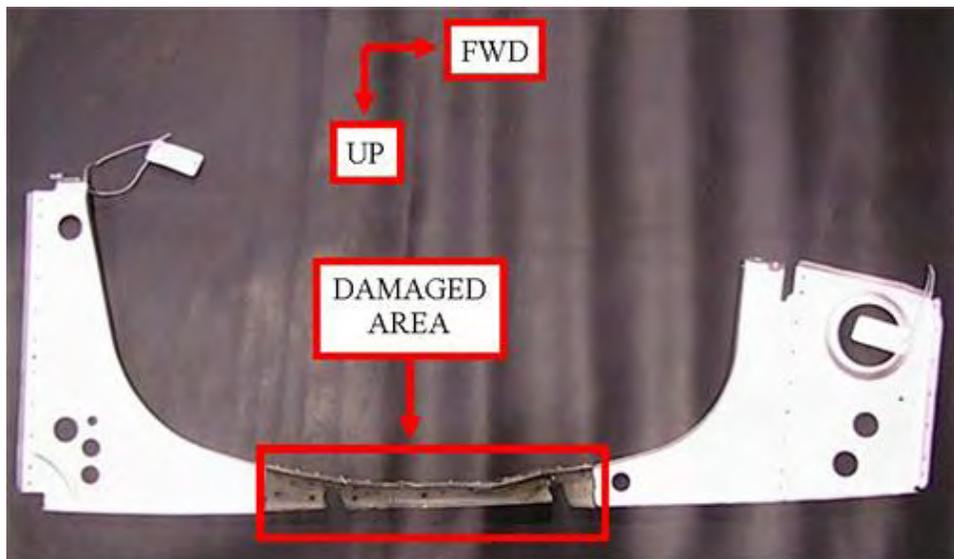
Macroscopic View of Crack on the Left Wing Rib Assembly WS 39.5 FS 161
